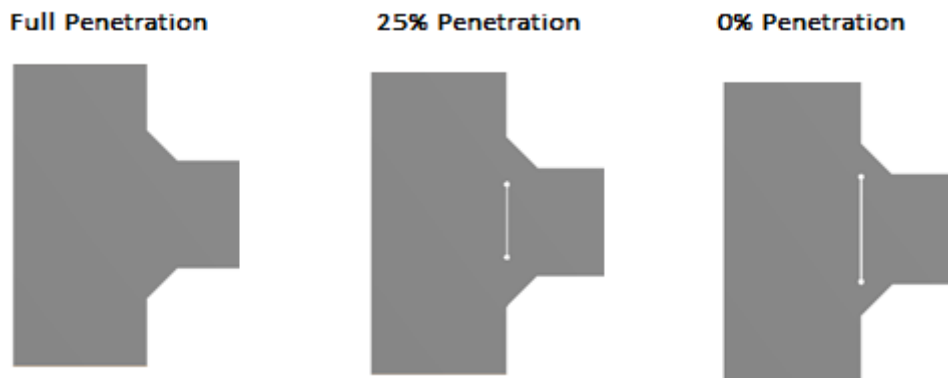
Illustration of the penetration ratio in the welded joint.
